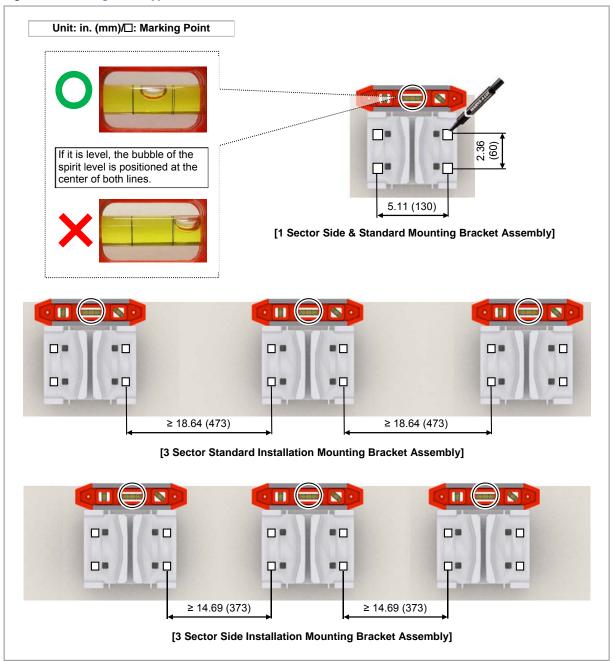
RRH marking dimensions\_3 Sector Wall Type (Side Installation)
